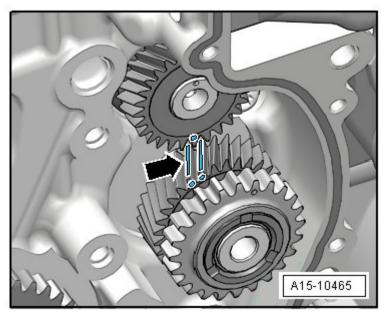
Identifying Tooth Face On Intermediate Shaft Sprocket Marked With Paint Courtesy of VOLKSWAGEN UNITED STATES, INC.
